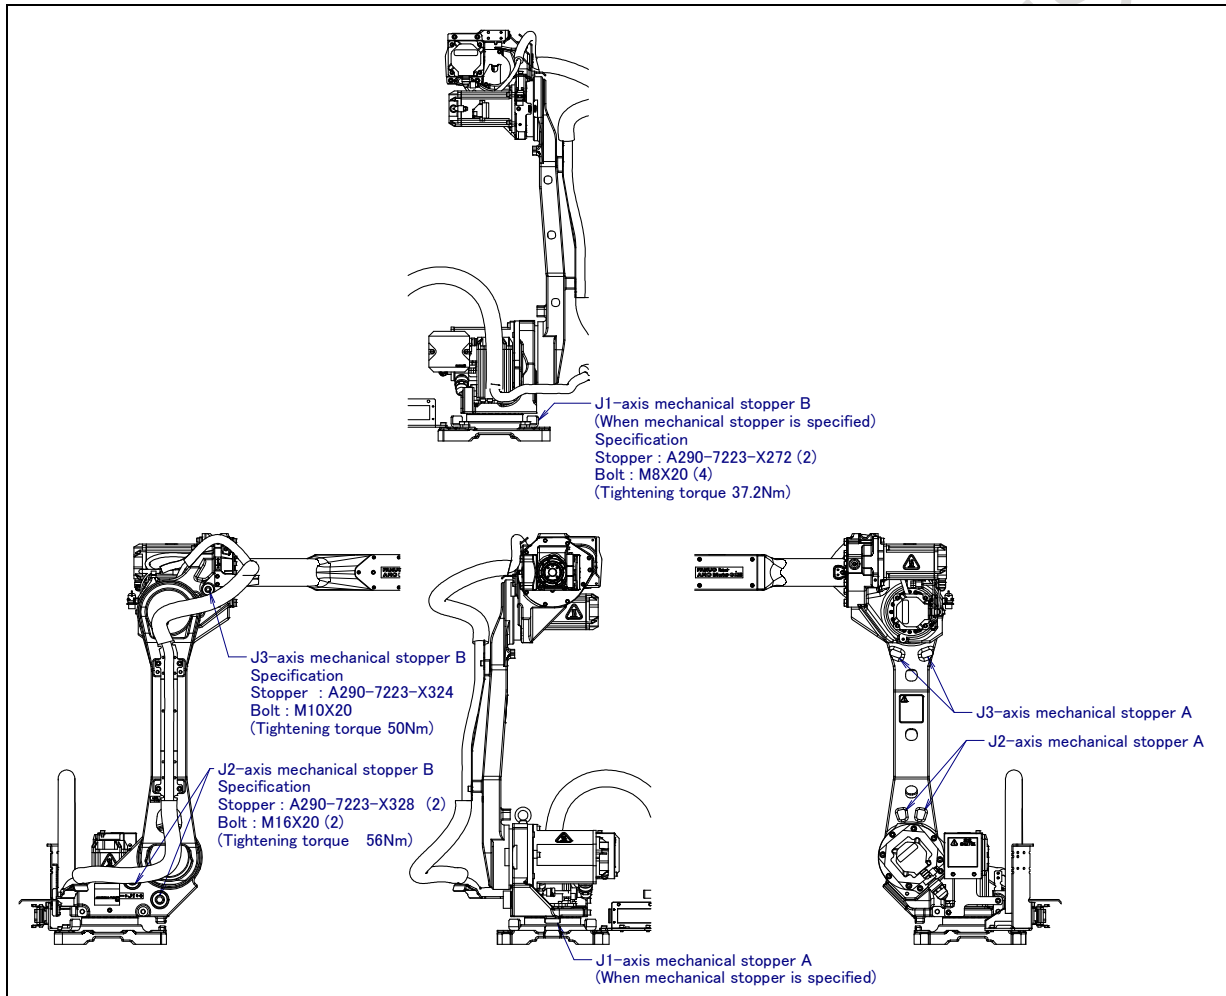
(a) Check of fixed mechanical stopper and adjustable mechanical stopper
